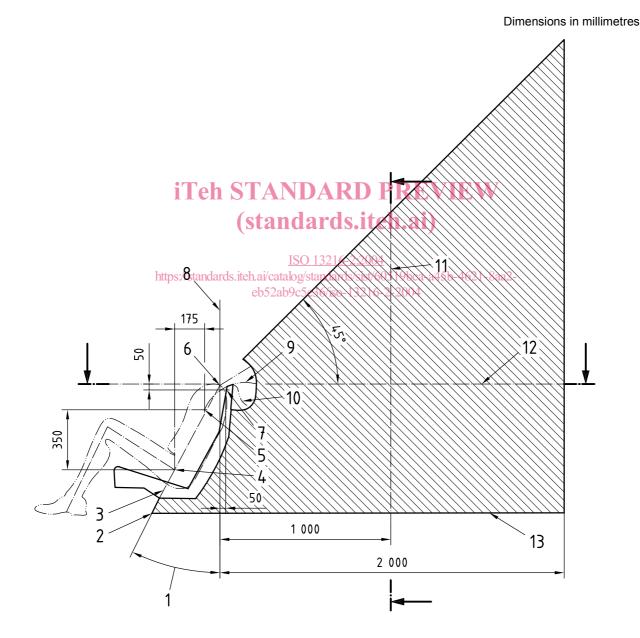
Top tether anchorage location — ISOFIX zone — Side view
